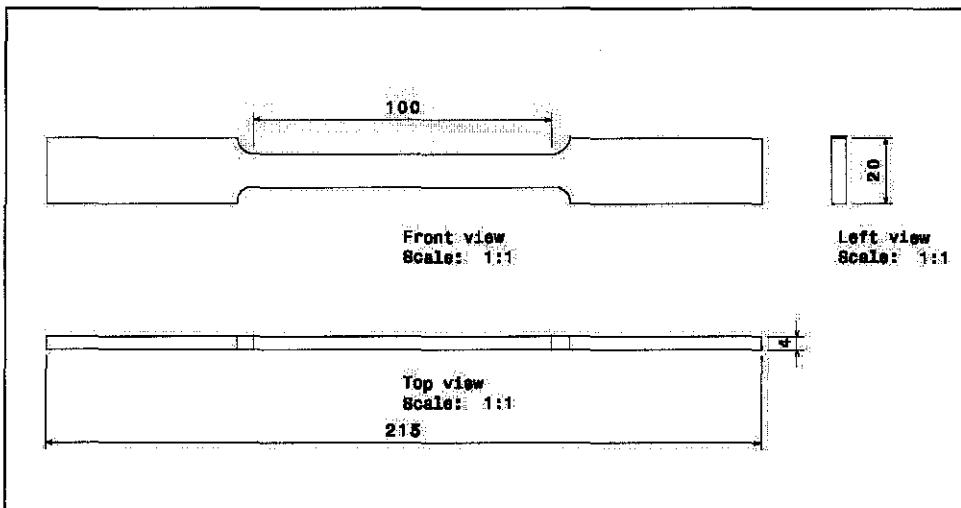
The dimension of standard shape for tensile test or “dumbbell”
